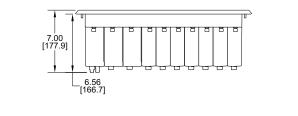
SEL-2240 Dimensions for 10-Slot Rack- and Surface-Mount Chassis
